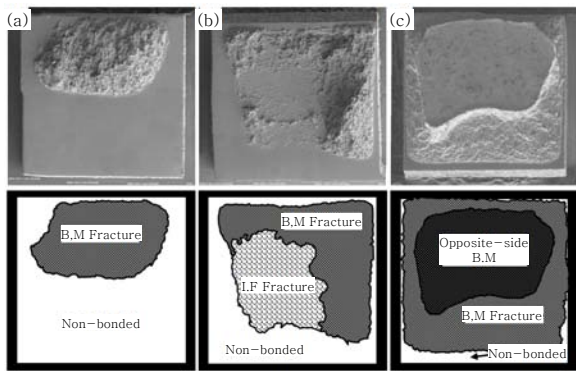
Fractograph of fractured specimens (a) W-type, (b) M-type, (c) S-type
